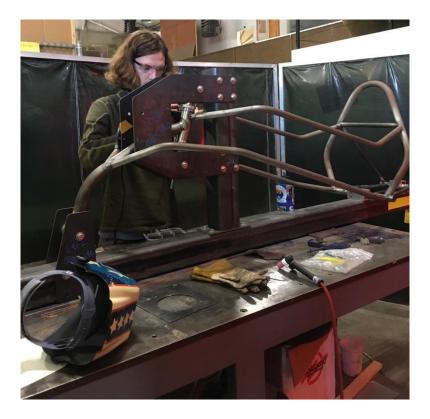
Eliot, the team welder, prepping joints for welding.
